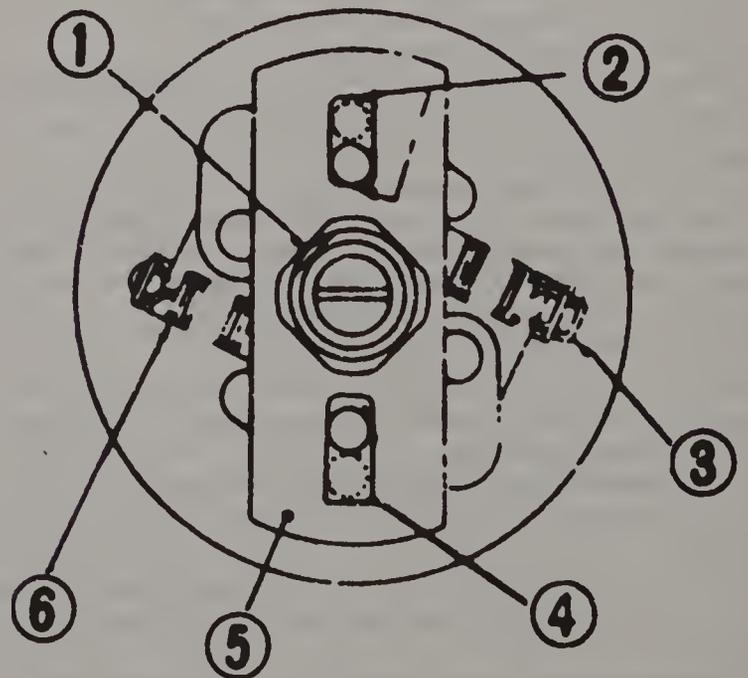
Cam and advance spring component positions – breaker point distributor (Sec 11)
